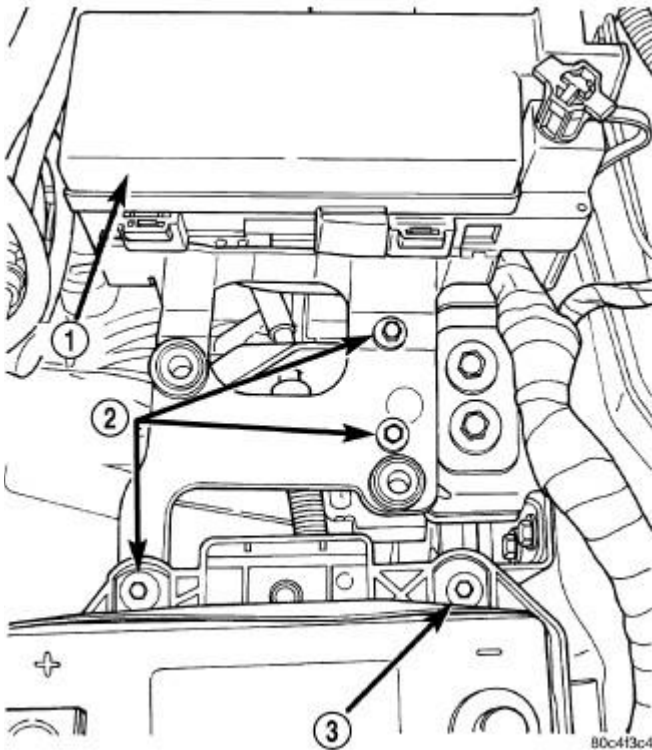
TIPM Bracket Attaching Bolts - Typical
